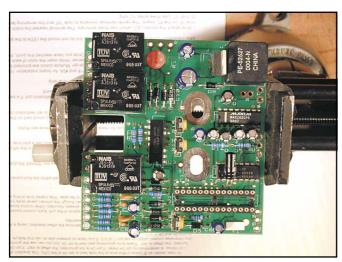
The assembled Rotor-EZ circuit board ready for installation in the rotator control box. The vacant 28-pin socket in the lower right hand corner of the board is for the PIC16C73 microprocessor.
